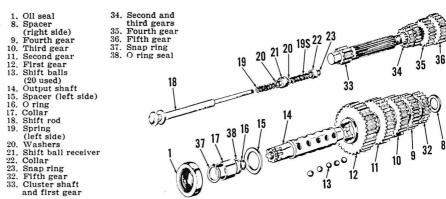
Exploded view of five speed close ratio transmission gears. On wide ratio transmission, first and second gears are part of cluster shaft (33) and other three gears are pressed on and not splined.
